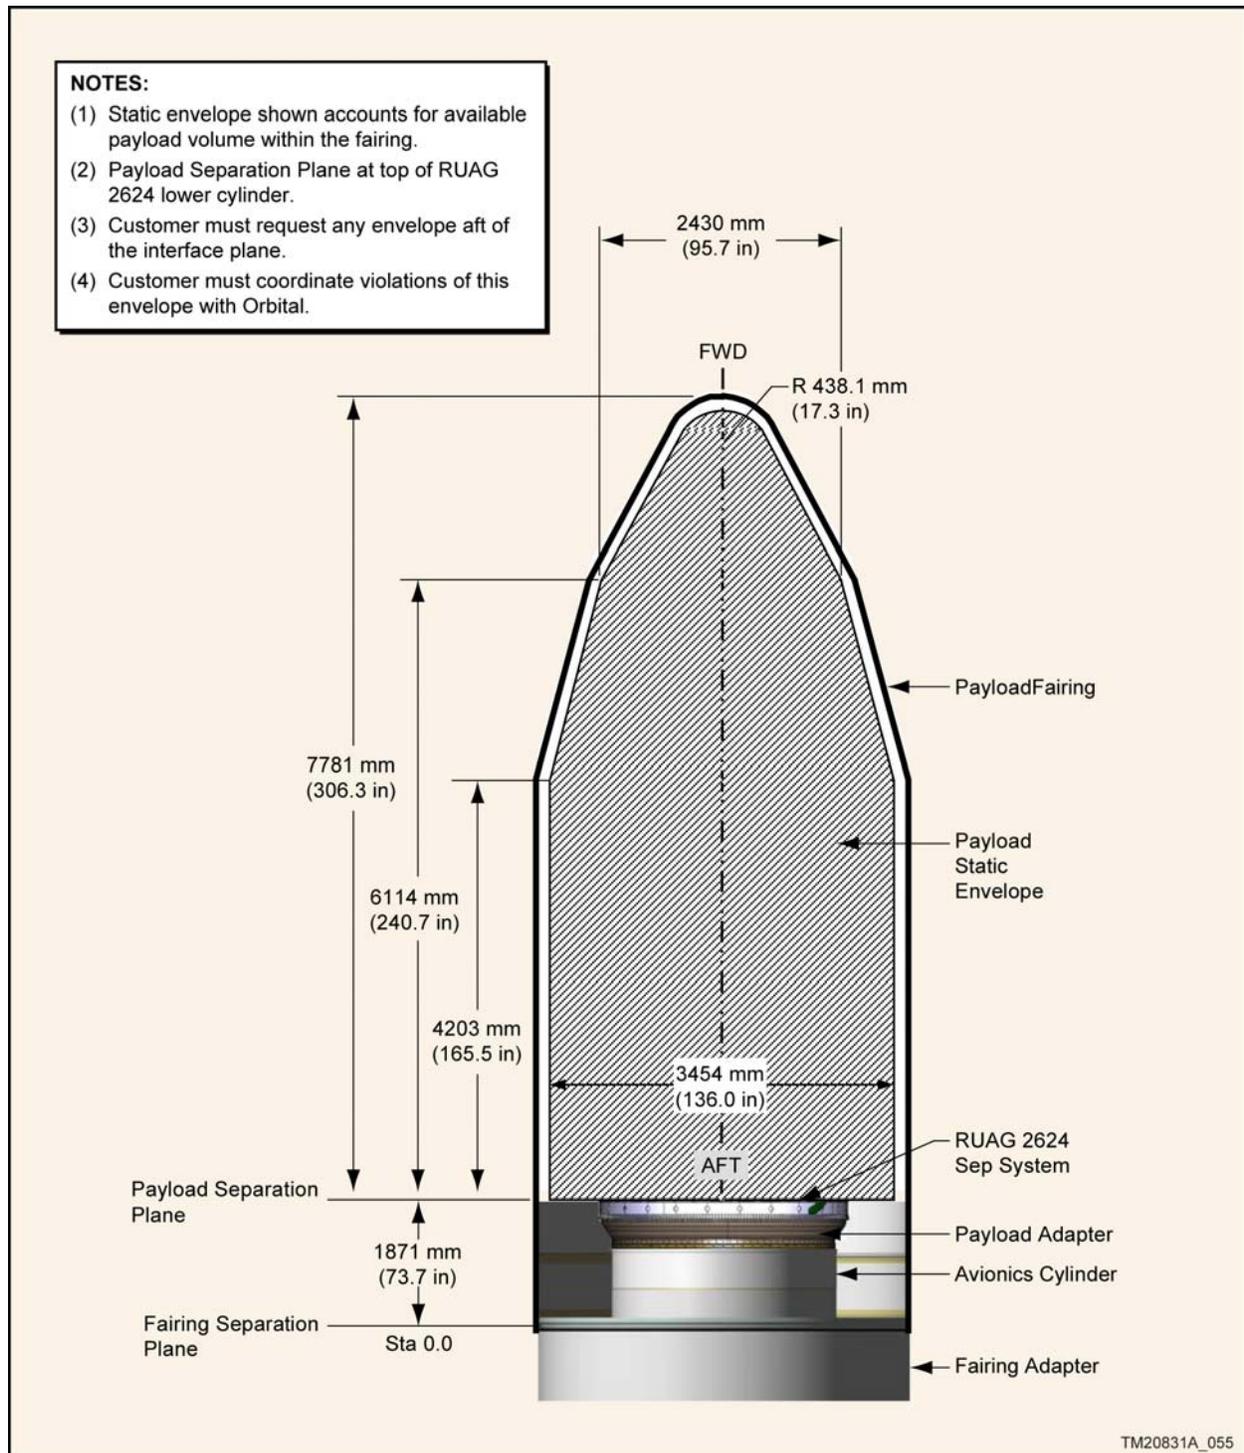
2624 Separation System Payload Static Design Envelope
